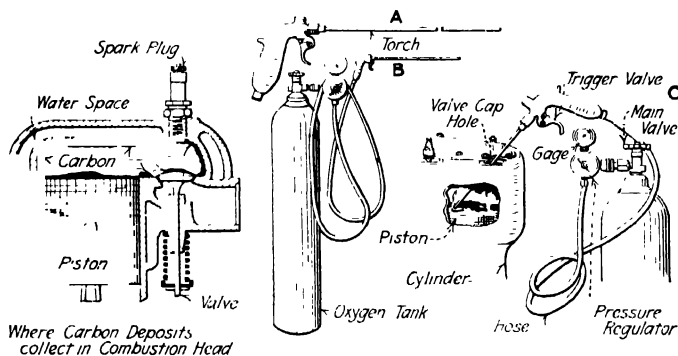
Showing Where Carbon Deposits Collect in Combustion-Chamber and How to Burn Them Out with Oxygen. A—Special Torch Used. B—Torch Coupled to Oxygen Tank Reducing Valve. C—Torch in Use.
